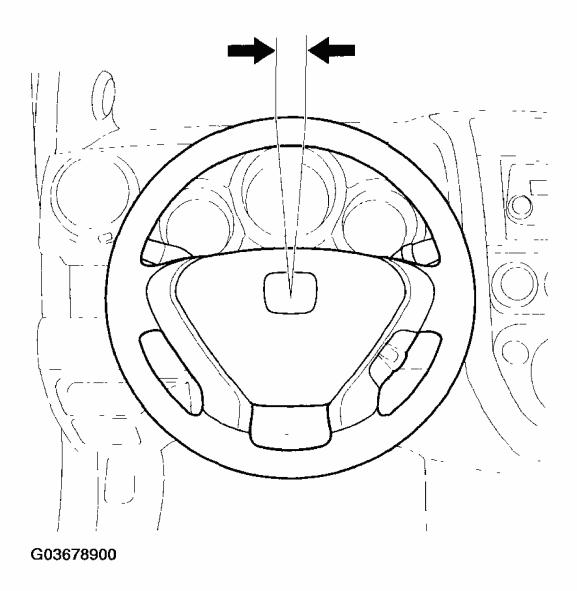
Identifying Steering Wheel Rotational Play Limit Courtesy of AMERICAN HONDA MOTOR CO., INC.
